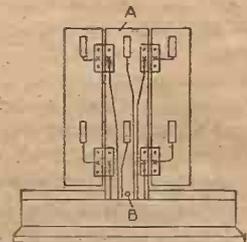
Back Elevation of Stand showing Wiring Connections.
